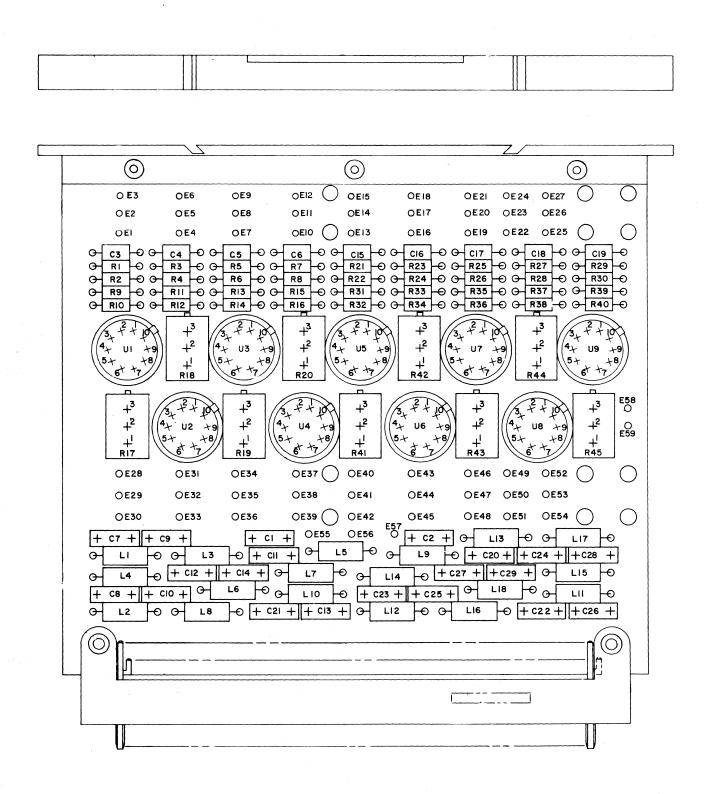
Read Amplifier Circuit Card Assembly (7691825)
